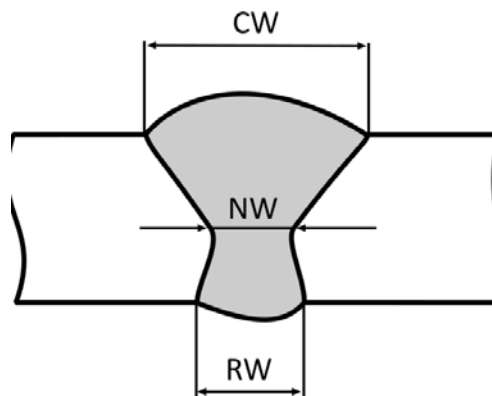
Bead cross section scheme: dumbbell-like profile of the welding bead
